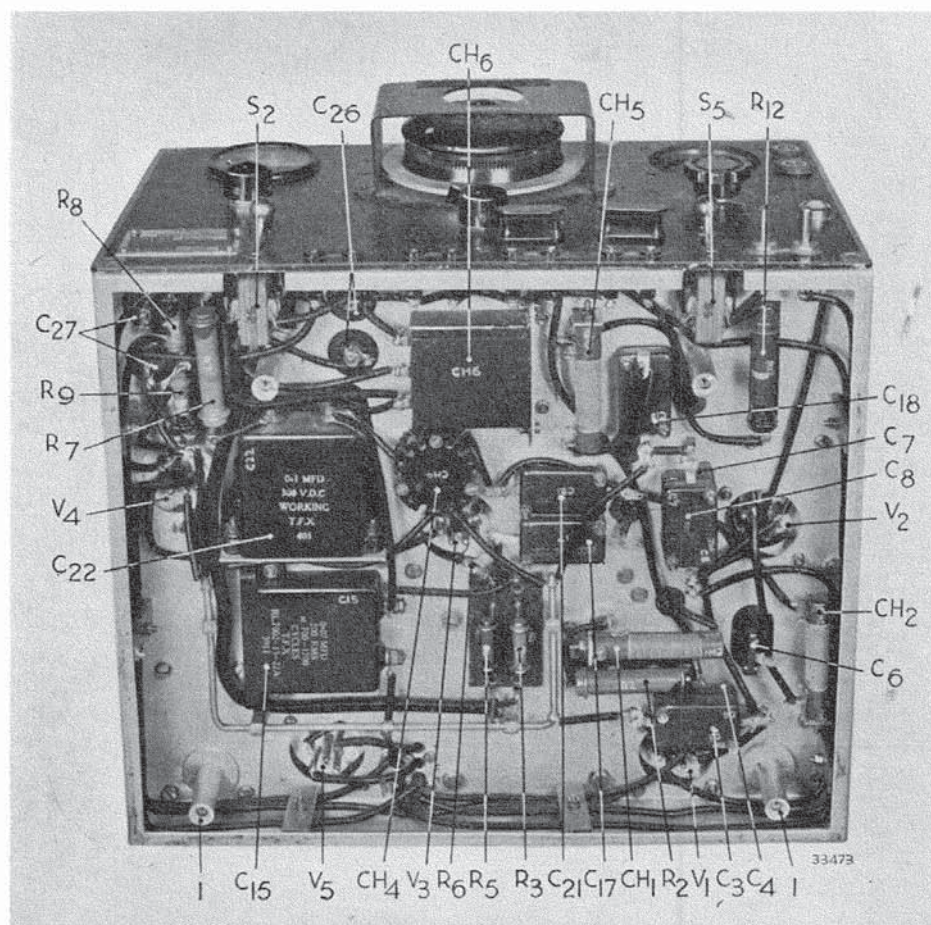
UNDERSIDE VIEW OF CHASSIS
